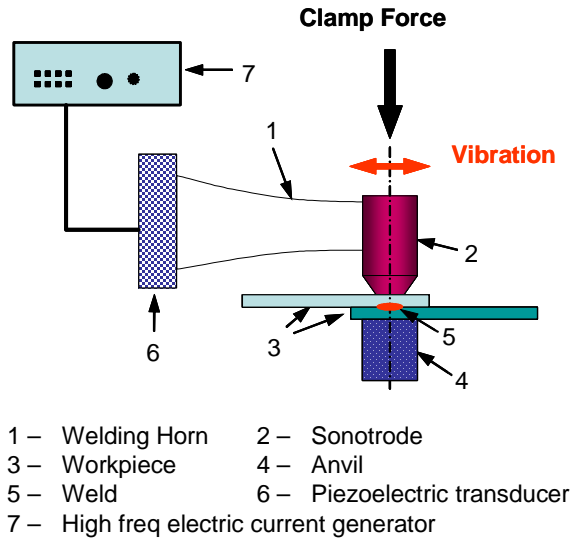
Schematic setup of ultrasonic welding process.
